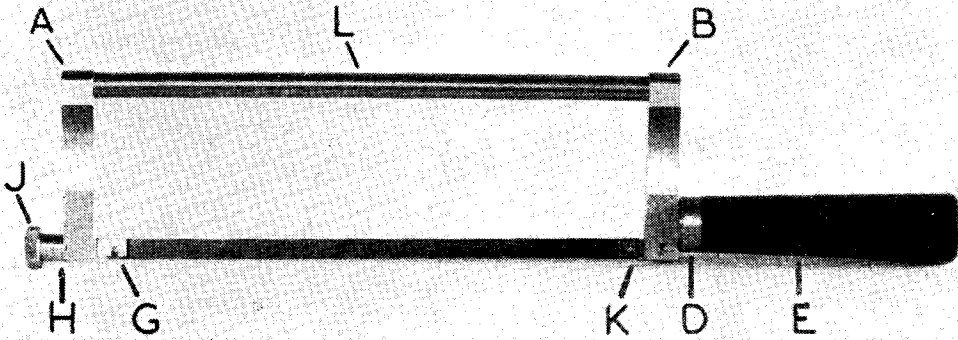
The finished saw frame. "A"—the front hanger; "B"—the rear hanger; "D"—the handle ferrule; "E"—the plastic handle; "G"—the front blade fork; "H"—the fork collar; "J"—the tensioning nut; "K"—the rear blade fork; "L"—the frame back
